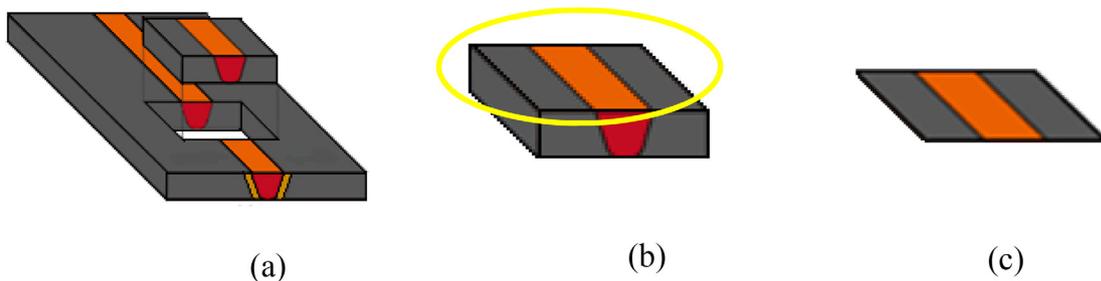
(a) Specimen was cut perpendicular to traversed path using EDM wire cut, (b) specimen for wear test and (c) area for morphology observation.
